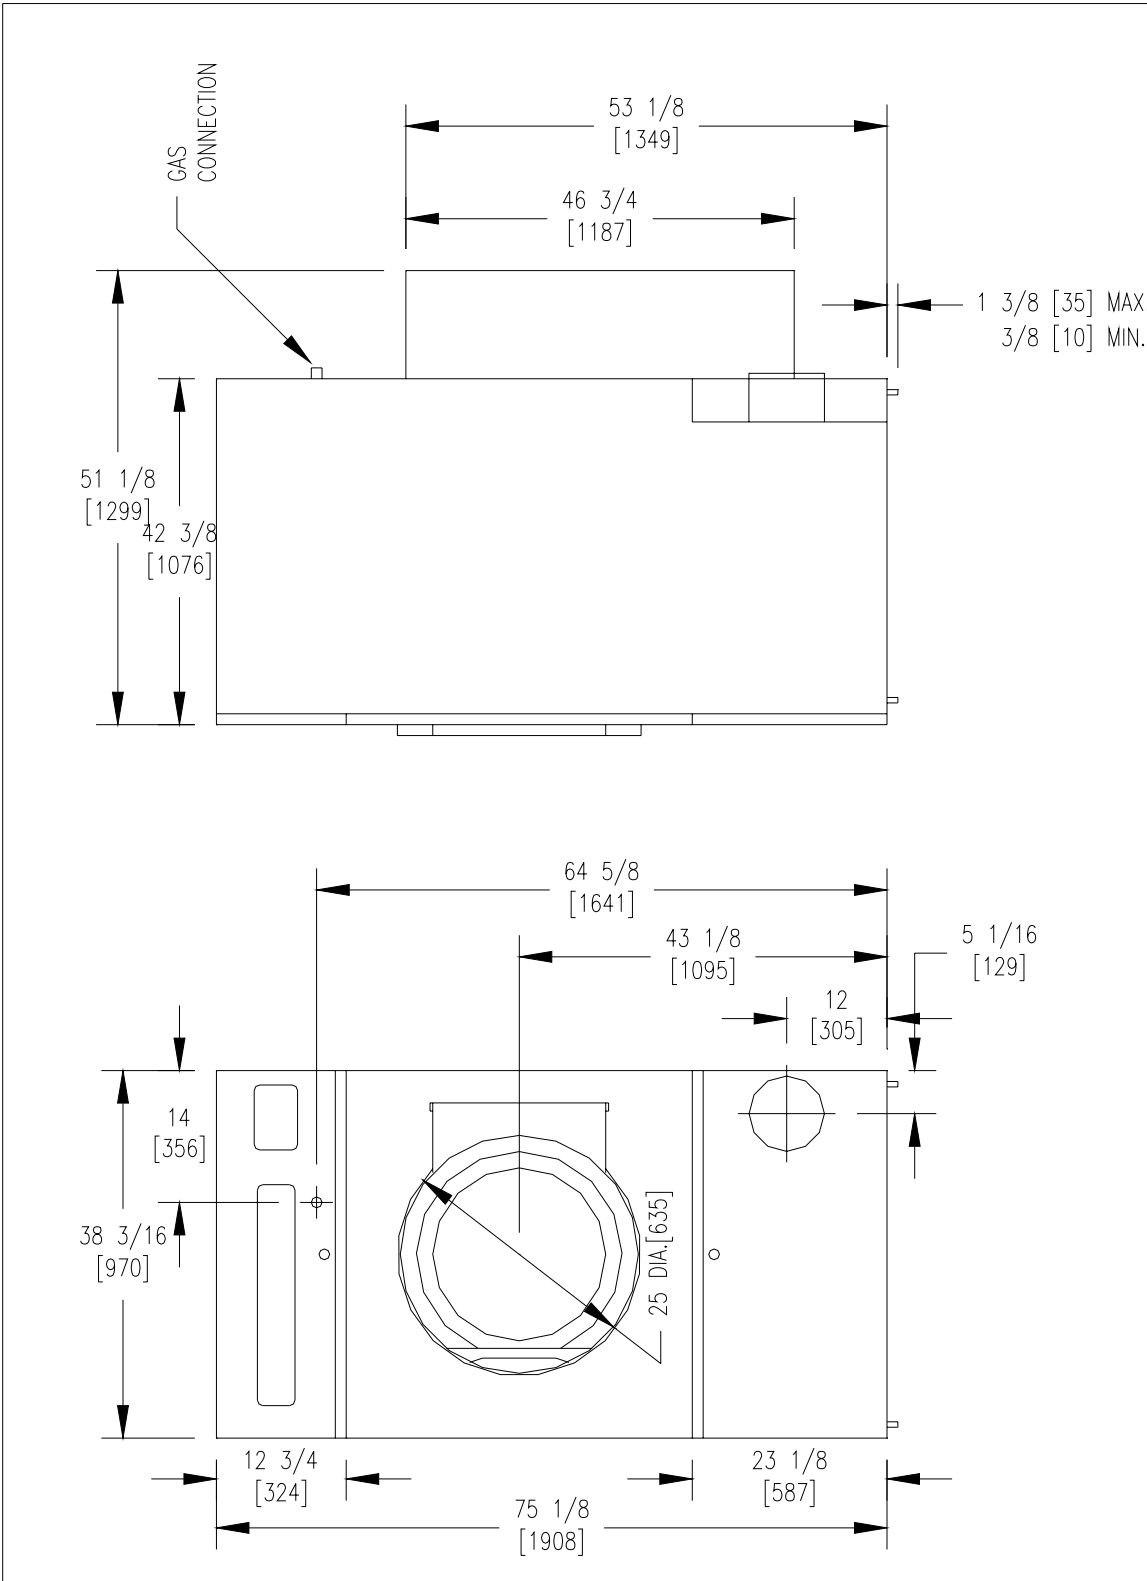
80# Dryer Dimensions, inches [mm].
